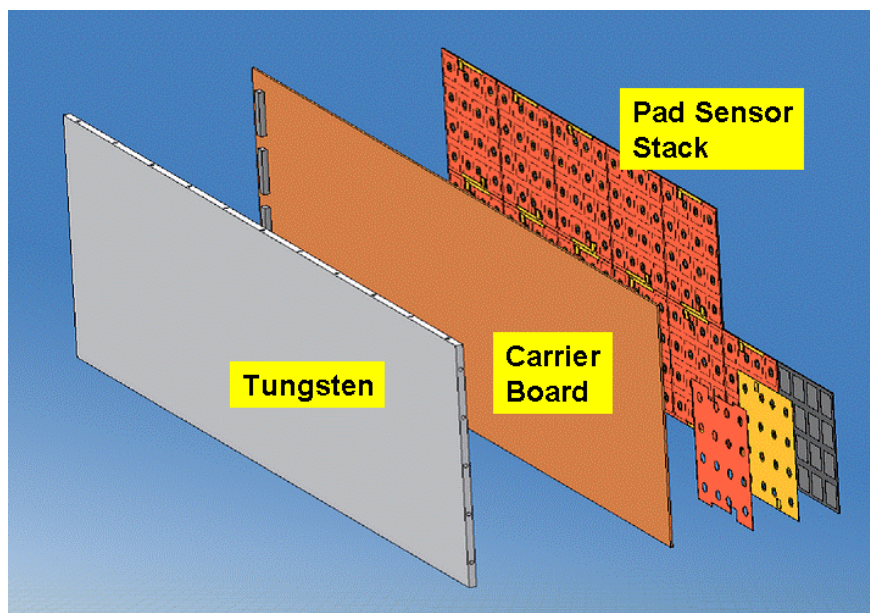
Exploded NCC pad-readout unit. Left to right: Tungsten, Carrier Board, Pad sensor stack described in Fig. 3.27.
